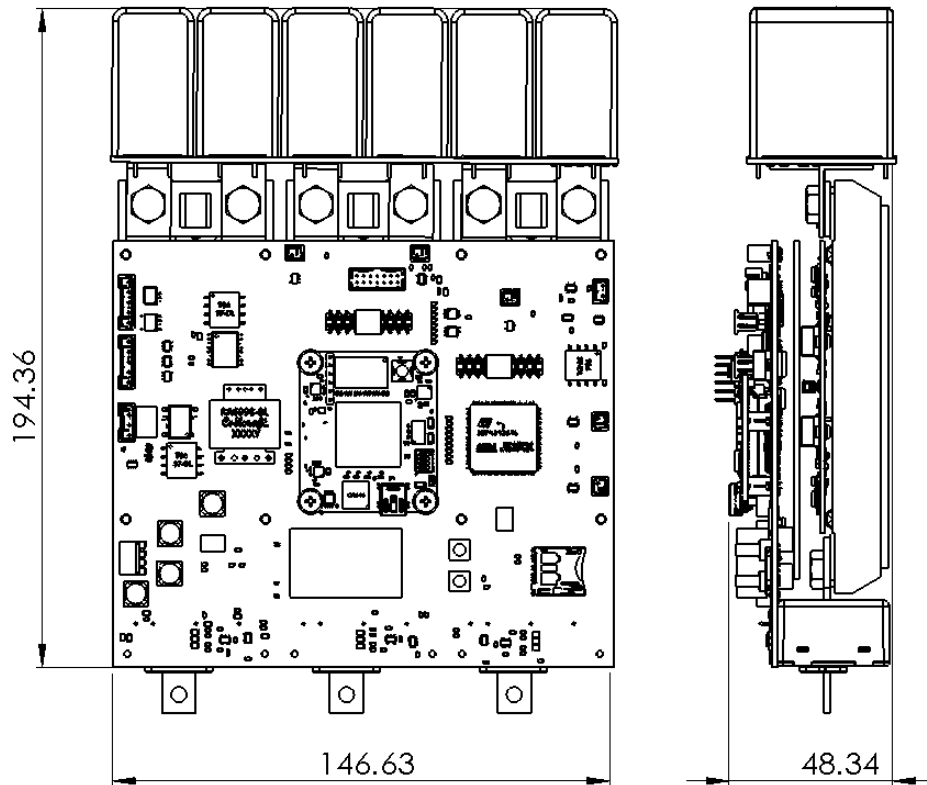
Mechanical drawing of the inverter (dimensions in mm).
